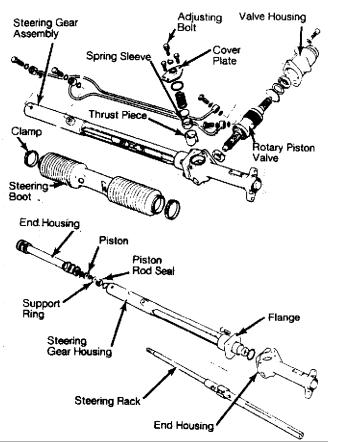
Exploded View of 100 & 200 Power Steering Gear Courtesy of Audi of America, Inc.
